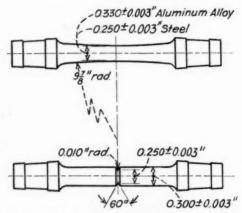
Unnotched and Notched Specimens for Rotating-Beam Machine.
